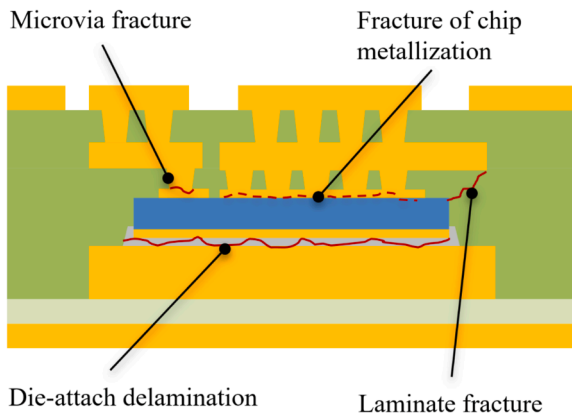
Illustration of failure modes in PCB embedded packages under thermomechanical stresses.
